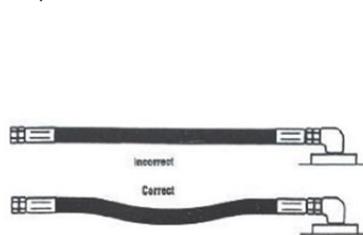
HOSE AND MACHINE TOLERANCES
